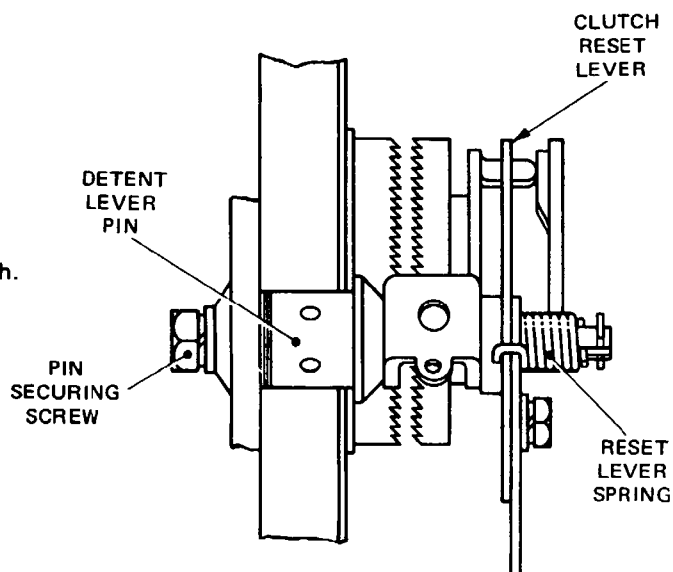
CLUTCH DETENT LEVER MECHANISM (LEFT-HAND SIDE VIEW)
